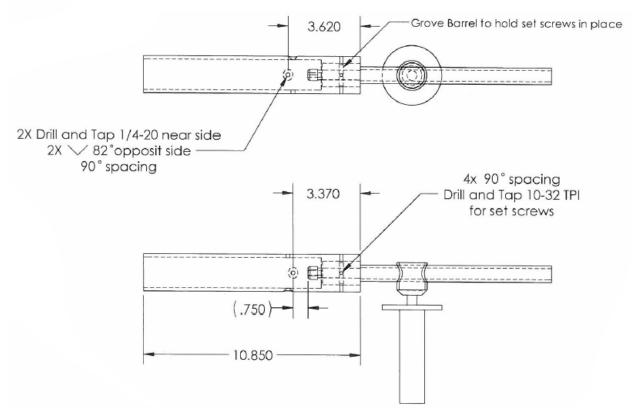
Sleeve Attachment Constructed for the StoneAge Attack Nozzle (Note that part of the trigger gun assembly is also shown.)
